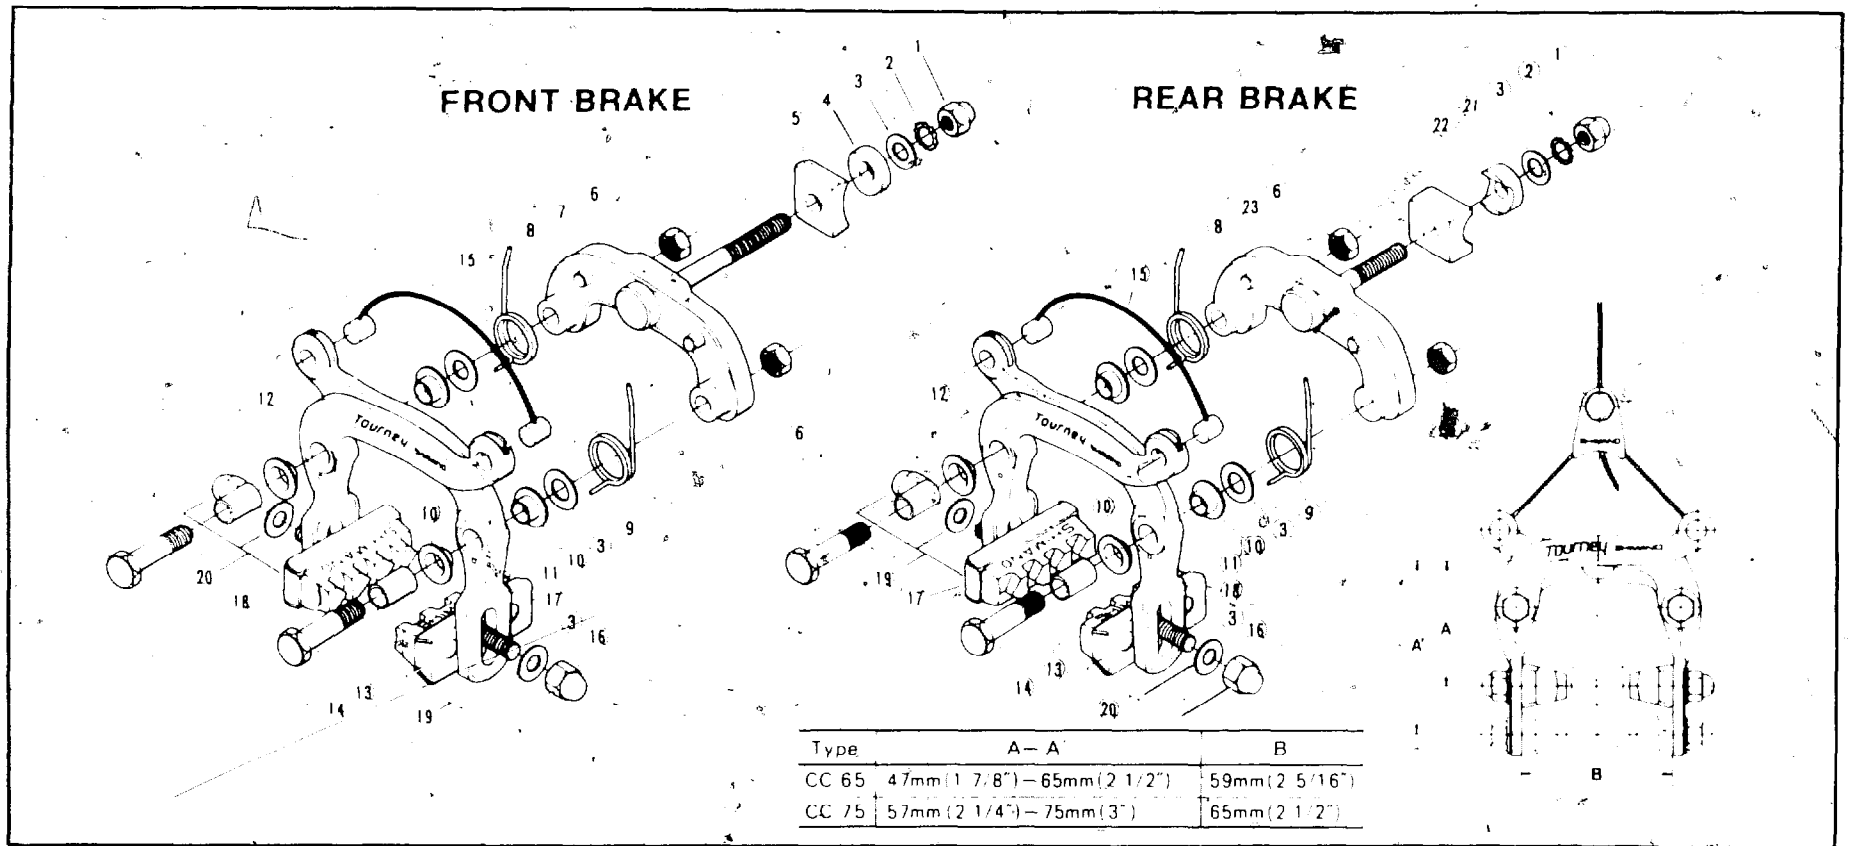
Exploded views of Shimano Tourney center-pull caliper brakes. Parts are: (1) lock nut for center bolt, (2) toothed lock washer, (3) washer, (4) radius bushing—front, (5) square seating pad—front, (6) lock nut for pivot bolt, (7) arm bridge with center bolt, (8) L.H. arm return spring, (9) R.H. arm return spring, (10) flanged thrust washer, (11) inner brake arm, (12) outer brake arm, (13) bushing, (14) pivot bolt, (15) center cable, (16) cap nut for brake shoe, (17) brake shoe—left, (18) brake shoe—right, (19) brake shoe complete—left, (20) brake shoe complete—right, (21) radius bushing—rear, (22) square seating pad—rear, and (23) arm bridge with center bolt.
